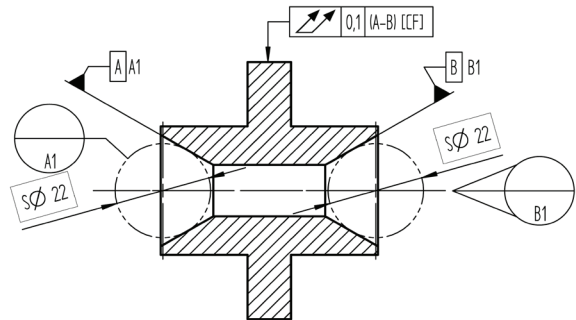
Example of datum system specification using a movable datum target and contacting feature [CF]
